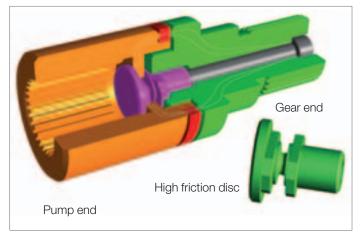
Pump safety shaft, new shaft assembly with central bolt
